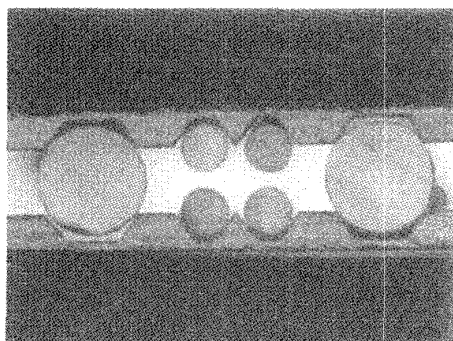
End-on optical microscope view of assembled microengineered quadrupole lens
